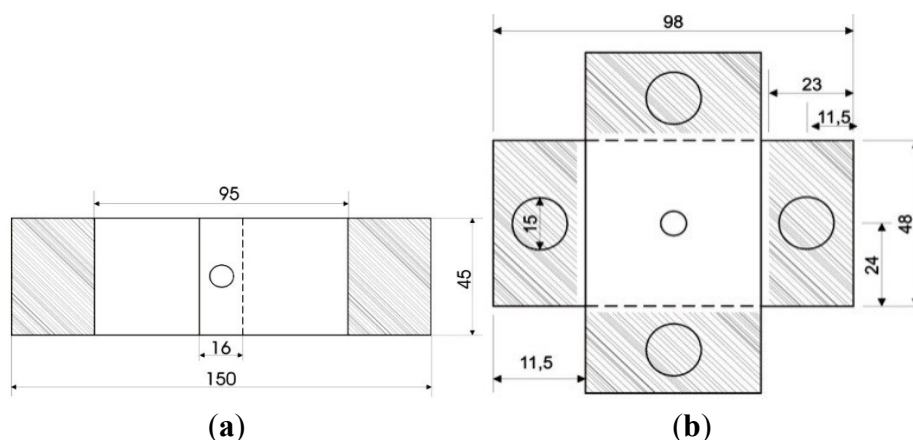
Specimen geometry: (a) tensile-shear test; and (b) cross-tensile test (The dimensions are all in mm).
